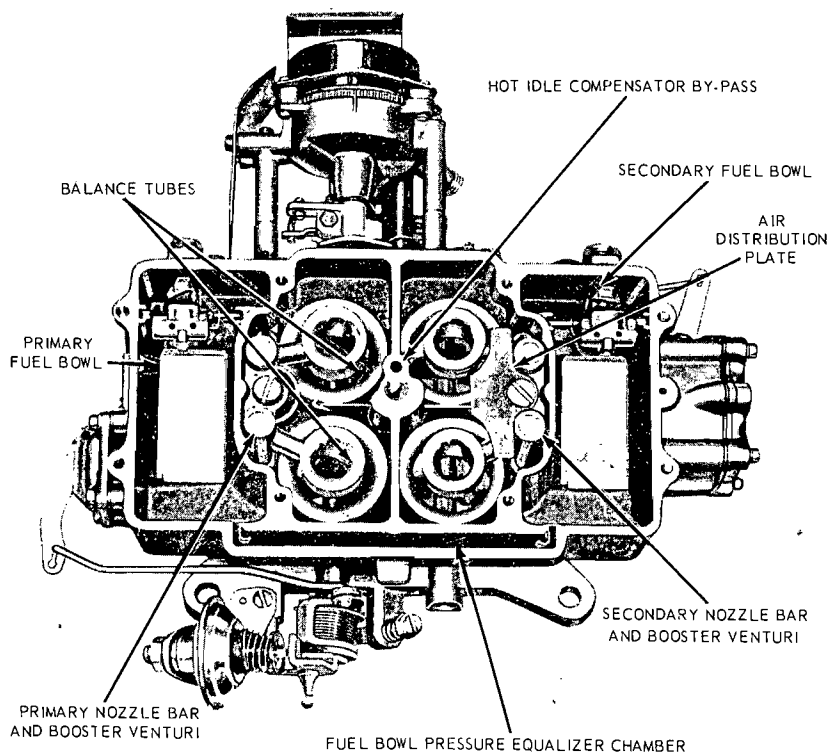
Autolite Model 4100 4-V Carburetor —Top View—Air Horn Removed
